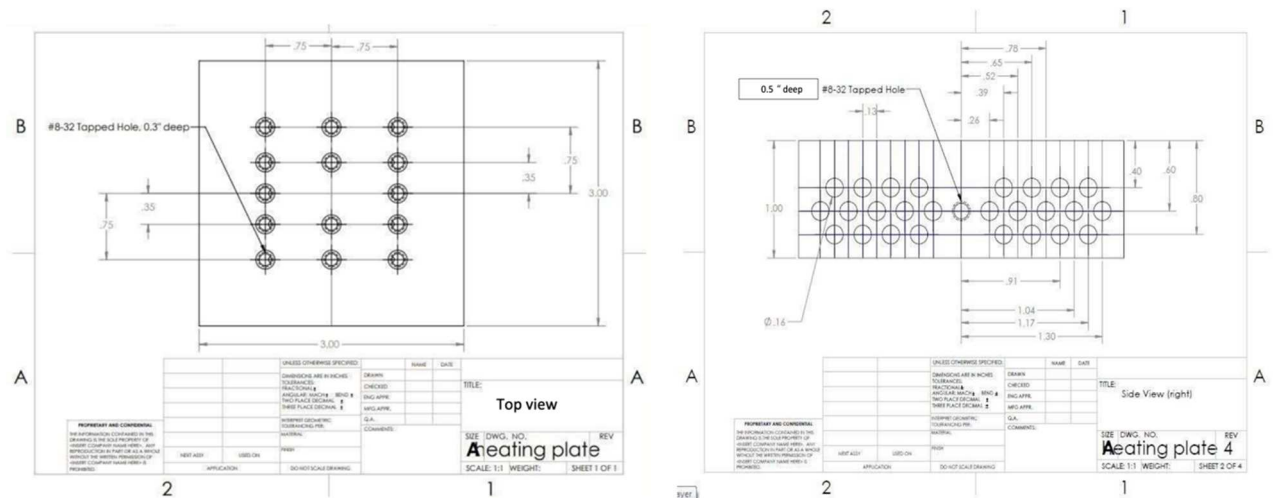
Dimension and placement of the holes machined into the graphite heating block (left) top view of the holes used for fixing the specimen on top (right) view of the side holes used for looping the resistive wire
